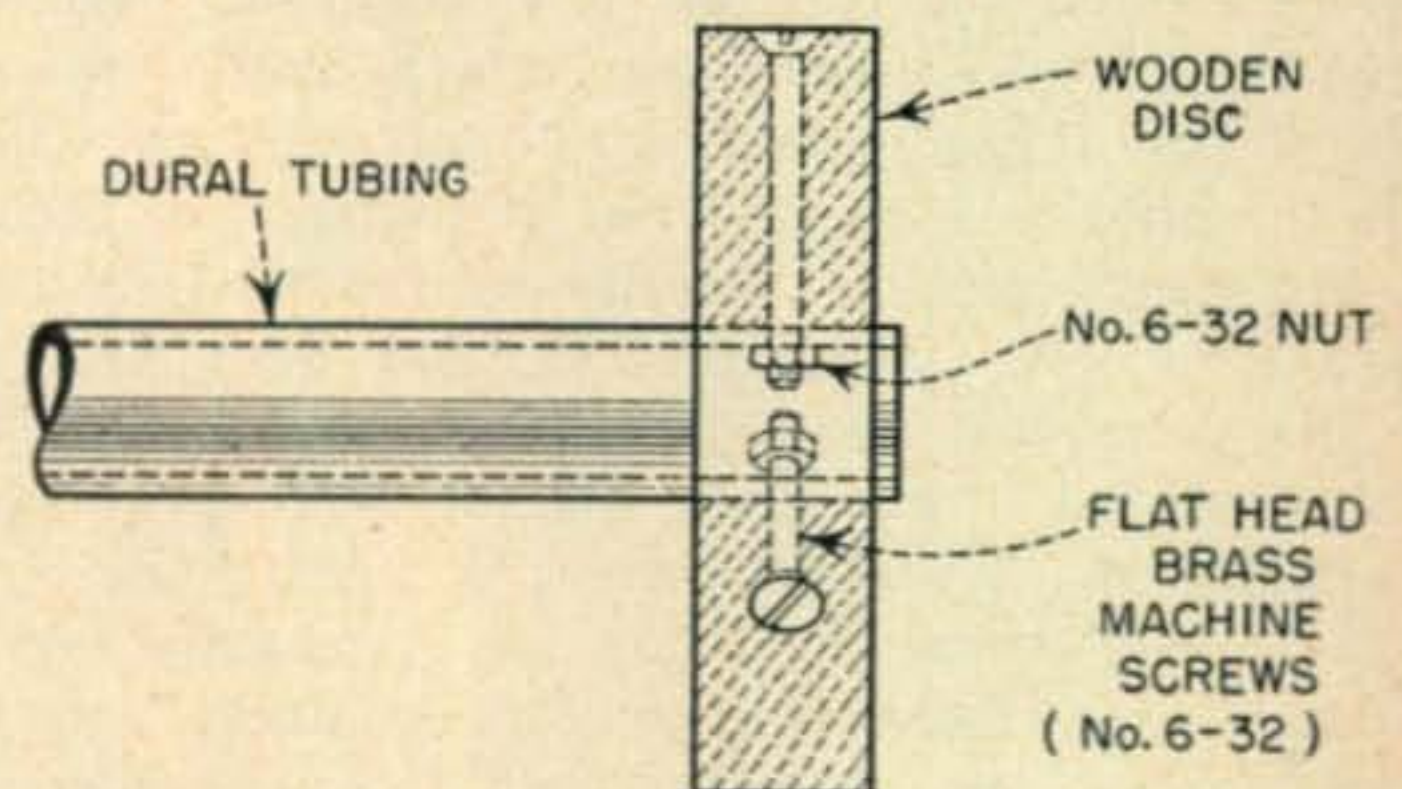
The wood plugs at either end of the coil form are drilled out to permit attaching them to the dural tubing. The text surrounding this drawing gives additional details.
